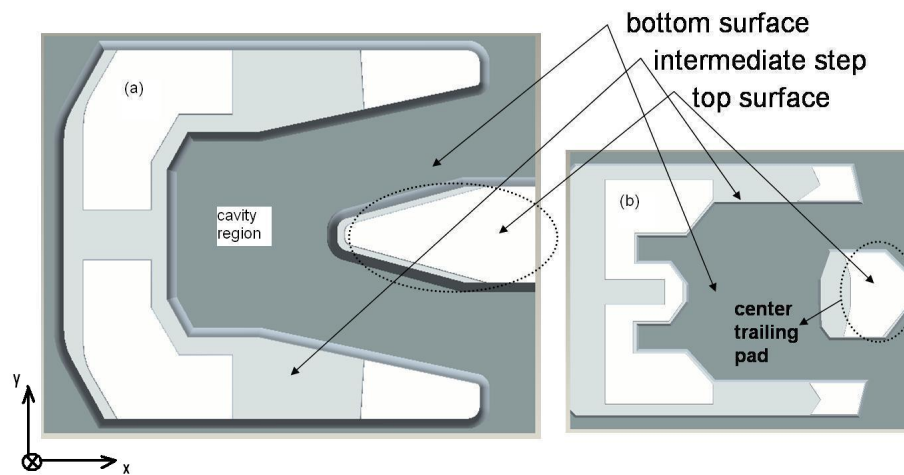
Slider air bearing design Pico (left), Femto (right)
